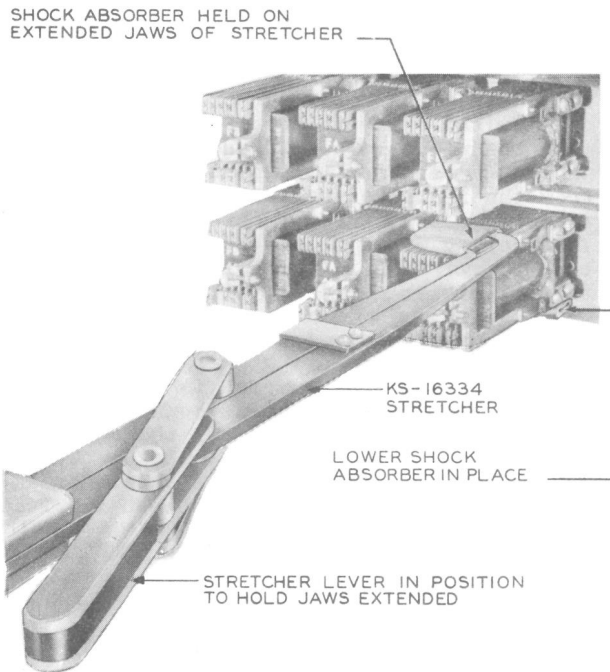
Inserting Shock Absorber Between Top of Relay and Mounting Plate Flange
